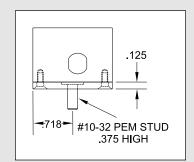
CXL02TG3-S Side View of Mounting Stud Option
